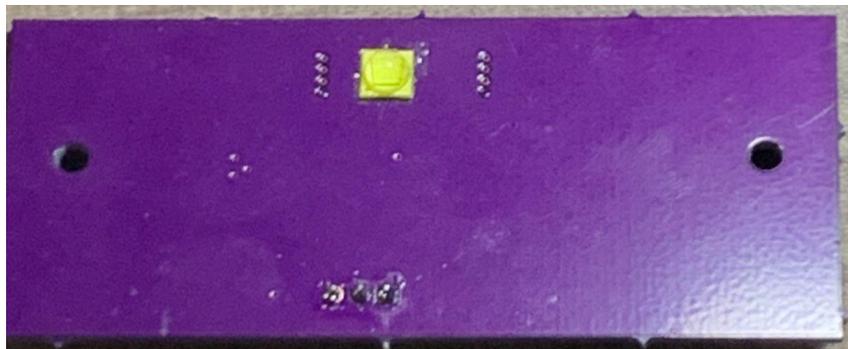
Strobe Light Board Back Unpopulated PCB
